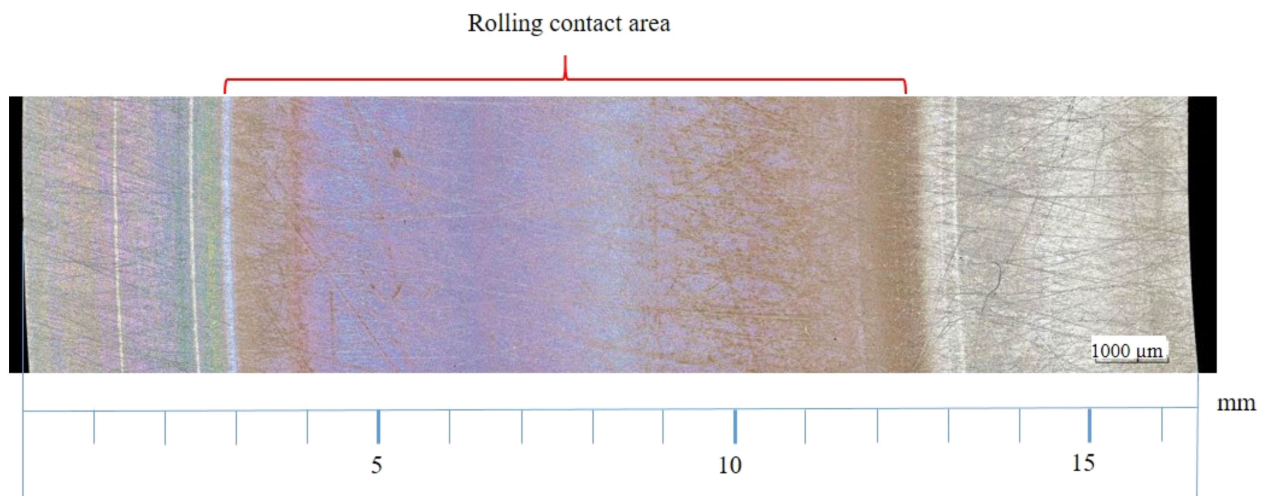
Photograph of the surface for a bearing washer TB 60-80 (60 kN load, 80 °C).
